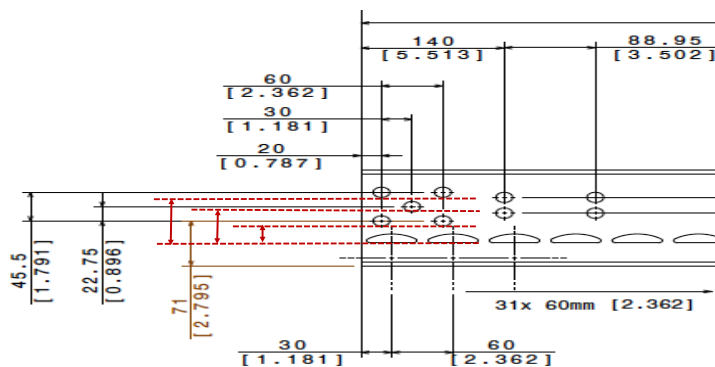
Critical Dimensional Measurement, the red arrows specify the places to measure
